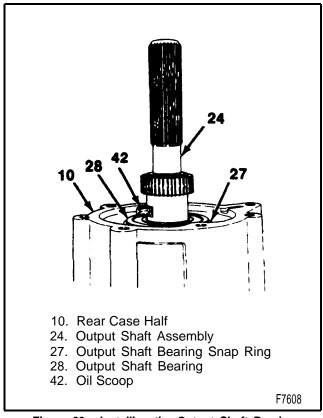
Installing the Output Shaft Bearing Snap Ring
